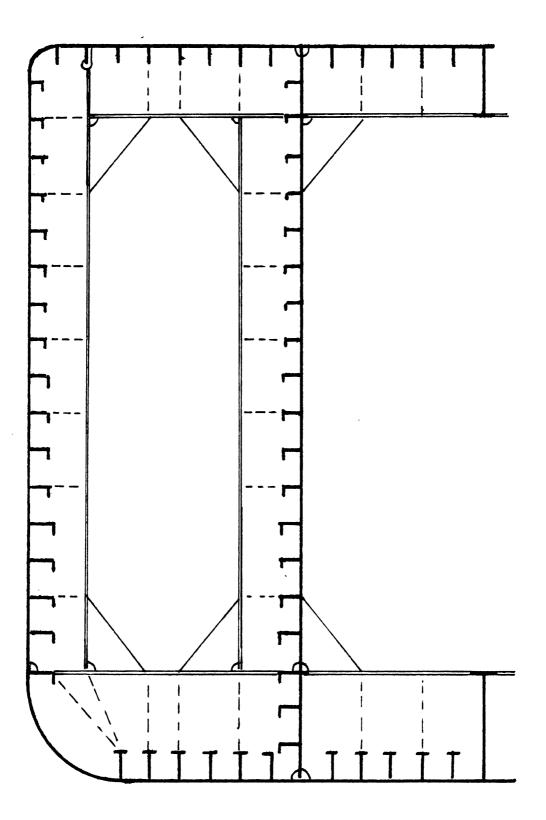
(a) Tanker structural detail for "layer" construction method.
